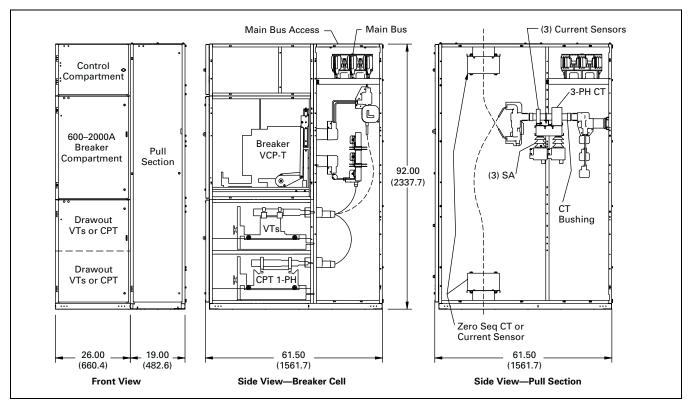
Typical Breaker/Auxiliary Unit and Pull Section, Cables Out Top or Bottom
